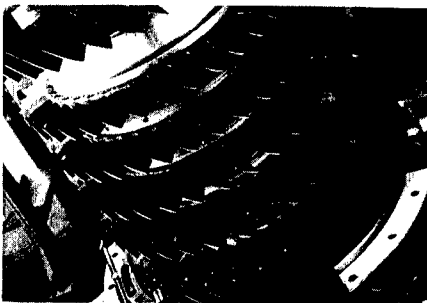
Damage to compressor blades caused by ingestion of Dzus fastener.
